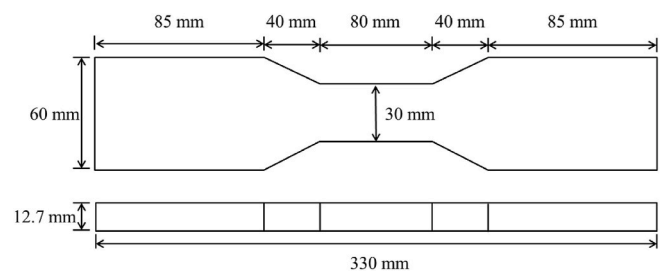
Dimensions of dogbone-shaped specimen for uniaxial tension test.
